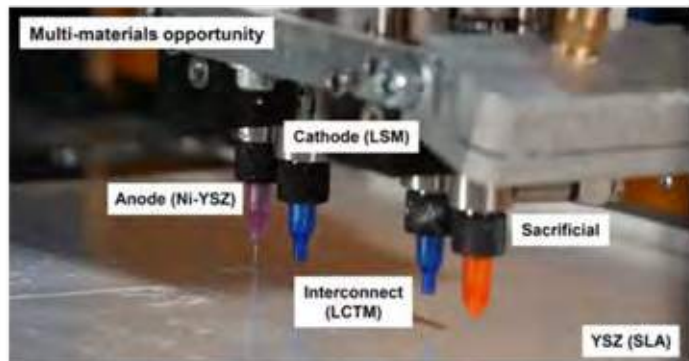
Robocasting robotic arm with 4 delivery ports over YSZ layer printed by SLA.
